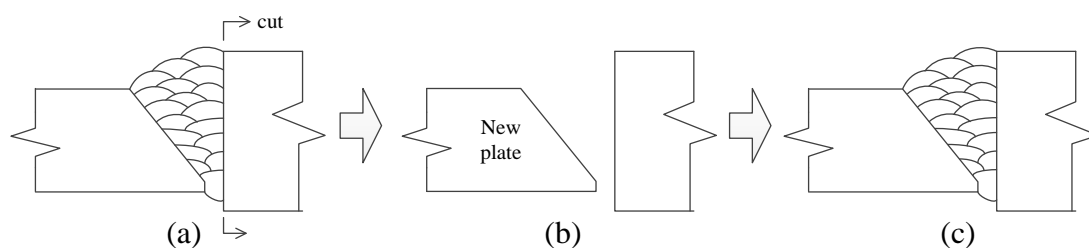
The sequence of repair weld of full penetration butt welds. (a) 30 mm and 50 mm plates welded together with single bevel butt weld. (b) Filler metal was cut off along with the 30 mm plate and new 30 mm plate placed and (c) plates re-welded together (first repair weld).
